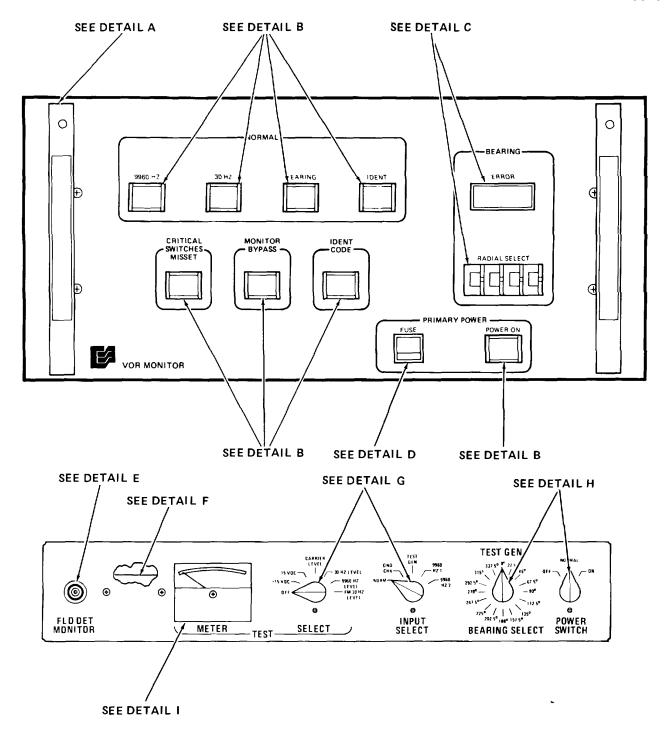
Monitor Front Panel and Chassis-Mounted Parts Location Diagram (Sheet 2 of 4)
